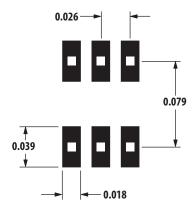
PCB Pad Layout for the AVT-5X663 (Package dimensions in inches)
